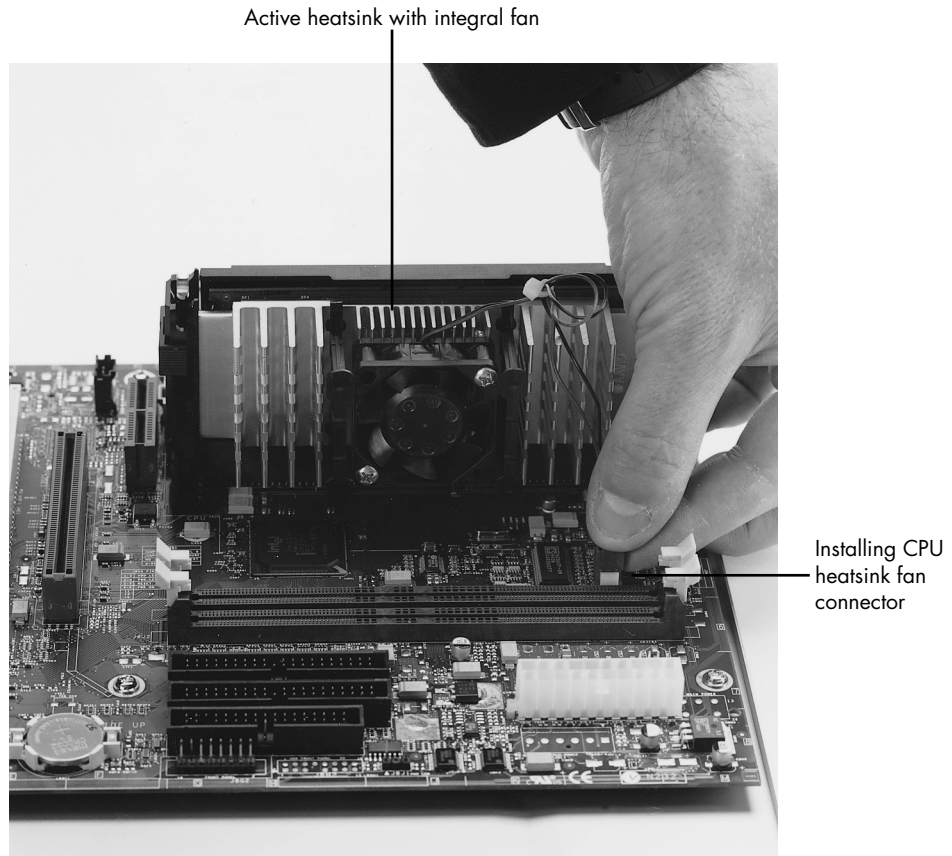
Attaching the heatsink fan power connector. *Motherboard and processor courtesy of Intel Corporation.
